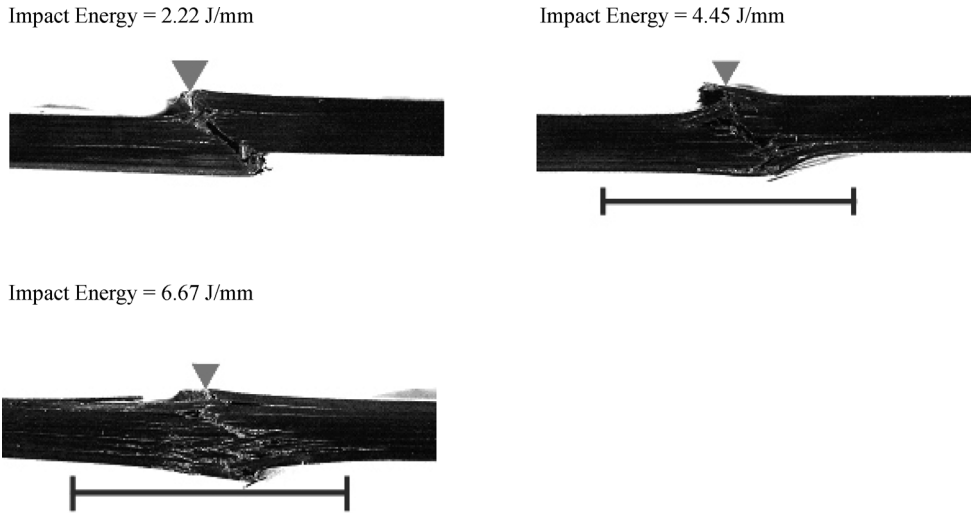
Impact damage and compressive failure observed on the cut section of the specimen after CAI tests at 180°C.
